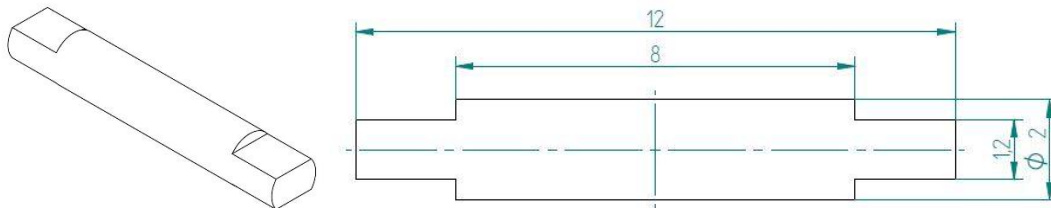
First model dimensions of the guided pin part. Source: Own elaboration.
